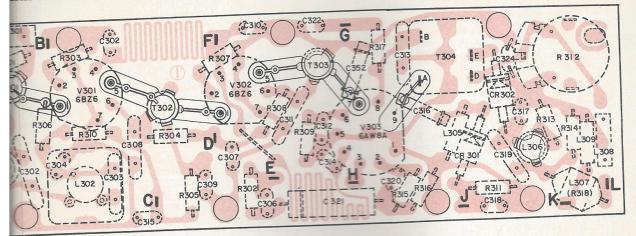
PW300 Printed Wiring Picture I-F Assembly
